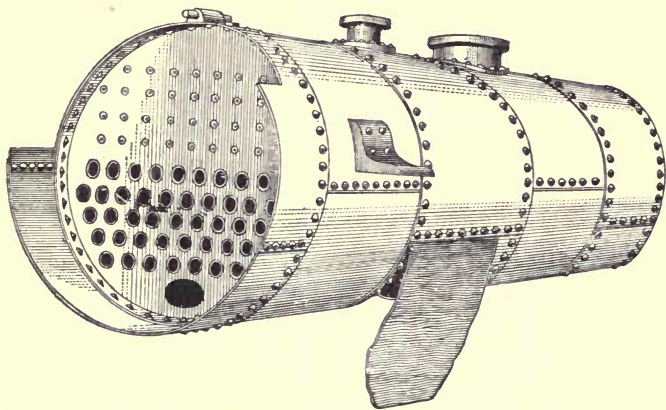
BOILER EXPLODED ; CAUSE, LOW WATER.
